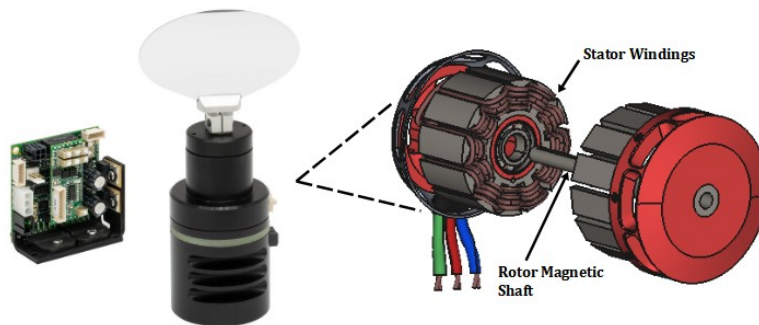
Exploded View of Rotating Magnet Motor Inside a Scanning Galvanometer
